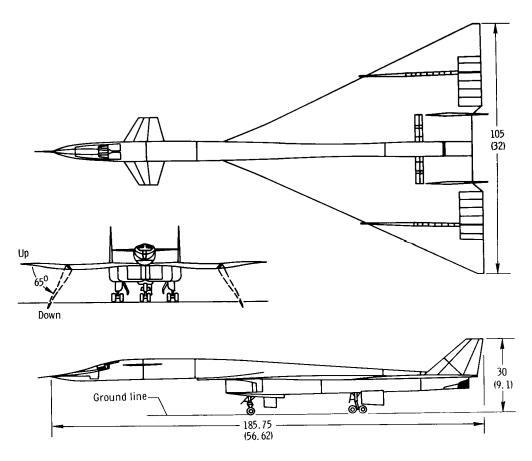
Three-view drawing of XB-70-1 airplane. Dimensions in feet (meters).
